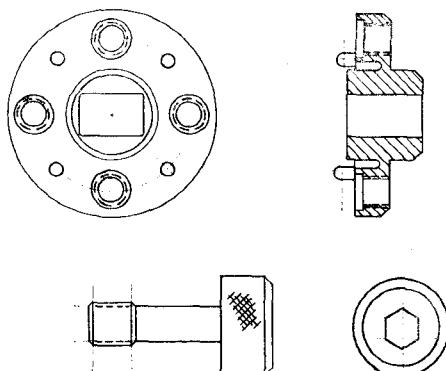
UG-385/U style millimeter flange used with alignment pins and undercut screws.
